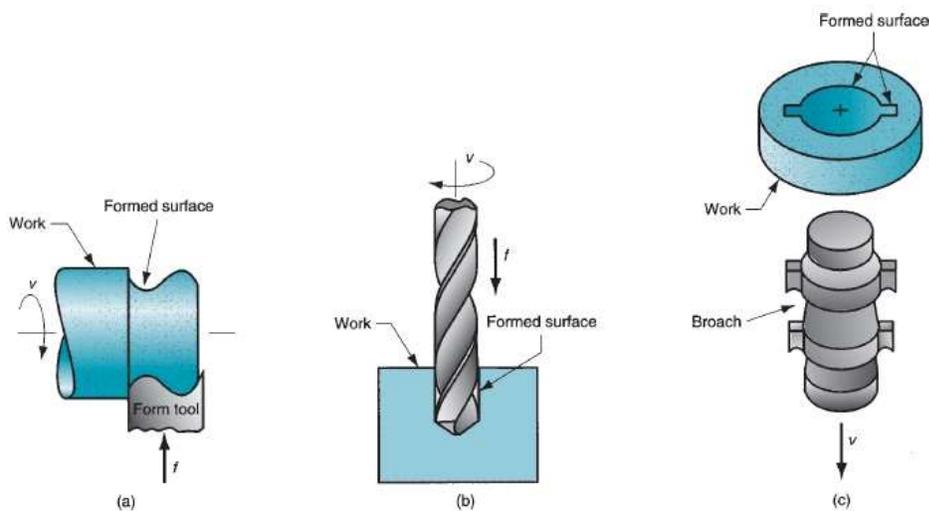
Forming to create shape in machining: (a) form turning, (b) drilling, and (c) broaching.
